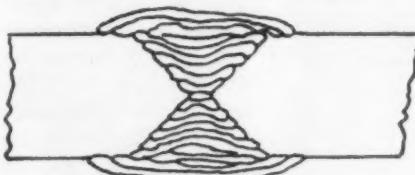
Cross-section of weld, showing how metal is lapped.
